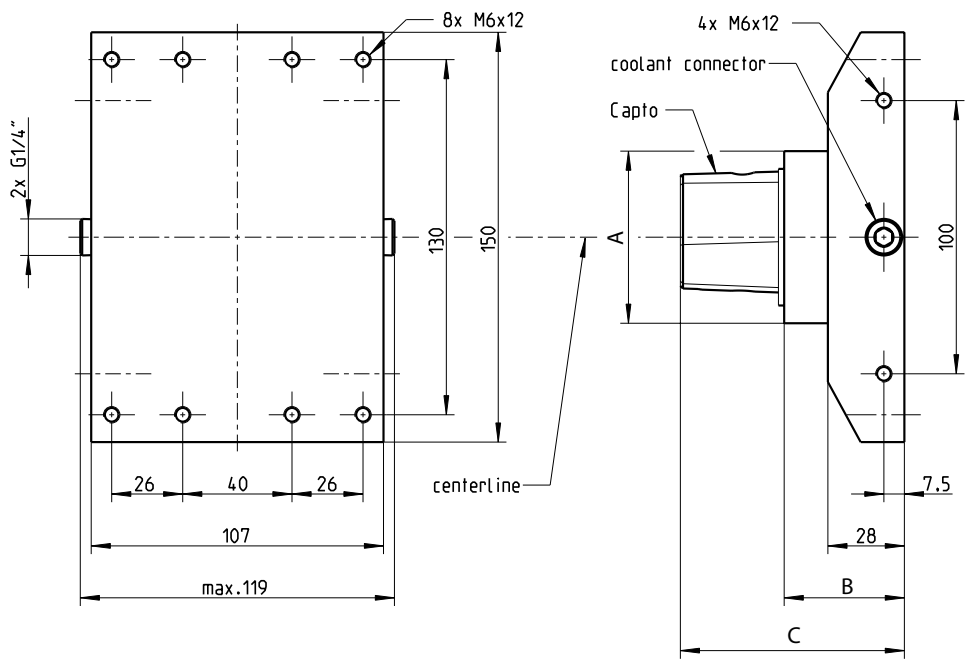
Machine adapter with Capto C... for disk-type turret with Coromant Capto clamping unit, Type 9129AC...
